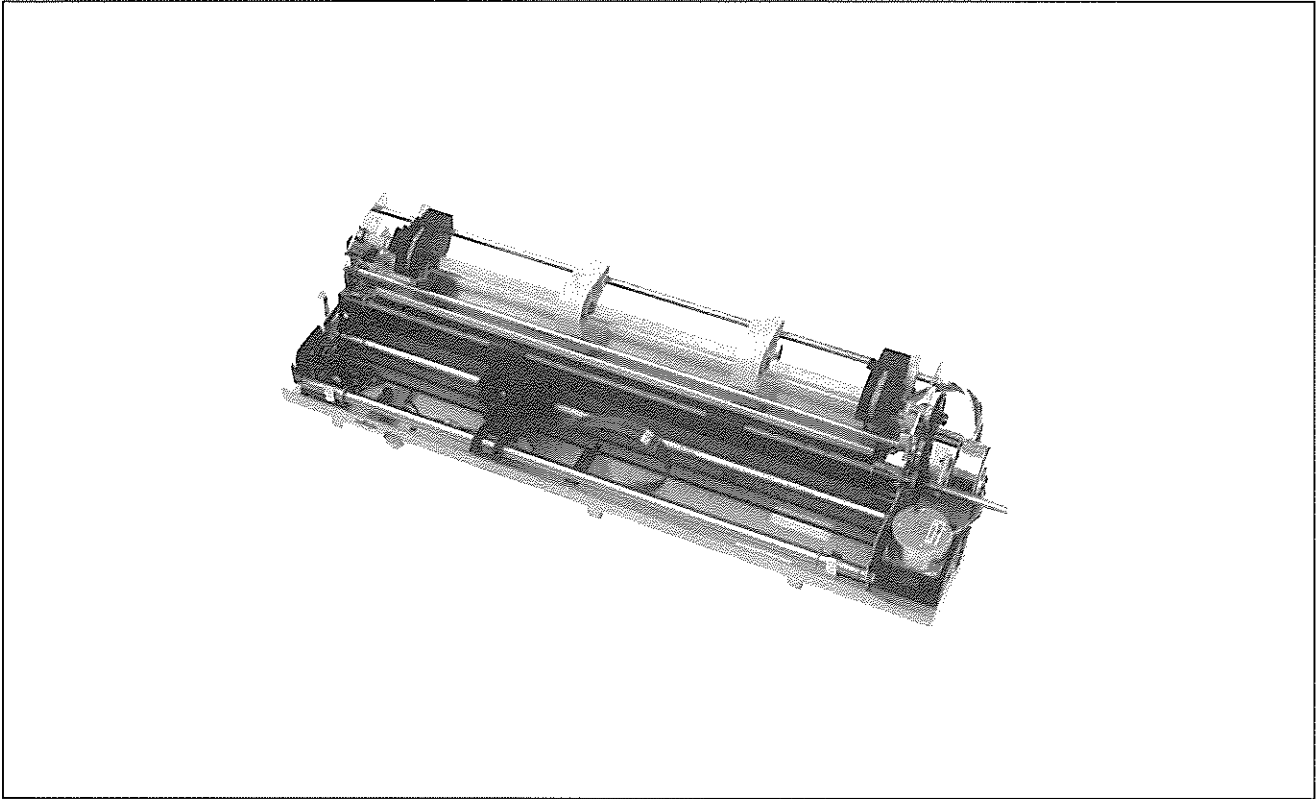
Model-3560 Printer Mechanism (FX-100+/FX-185/105)
